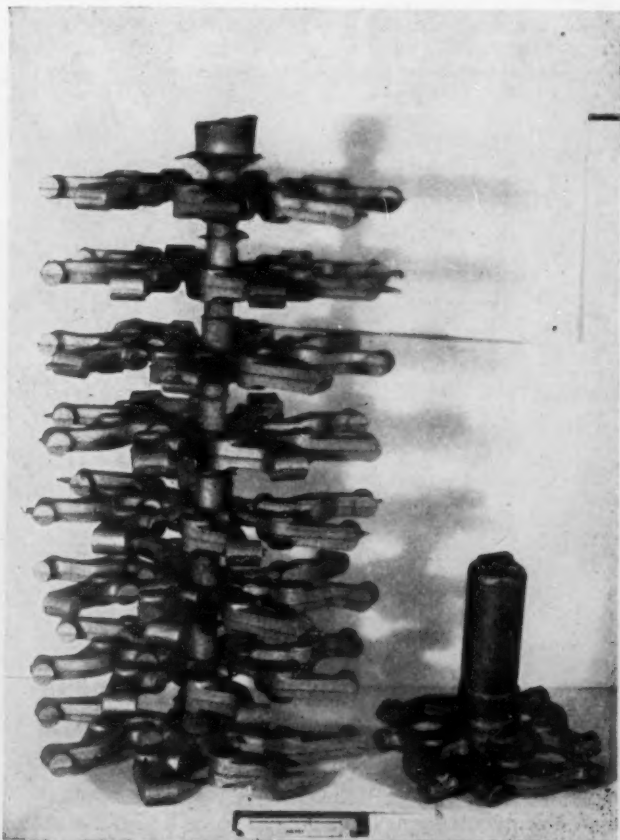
CASTINGS PRODUCED BY THE CENTRIFUGE METHOD WITH STACK MOLDING.
